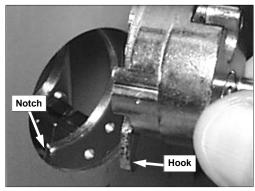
While holding latch in, place hook in front of the latch retractor and through the notch
